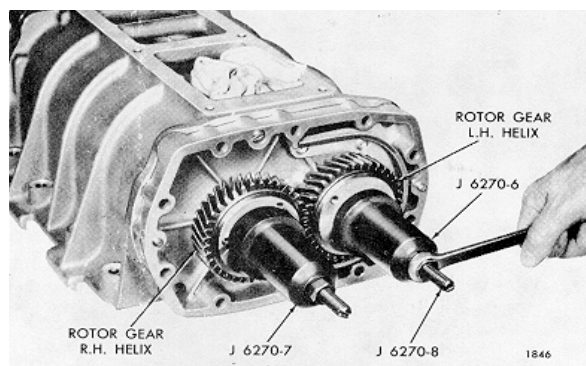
Installing Rotor Gears on Rotor Shafts for Preliminary Check of Clearances
